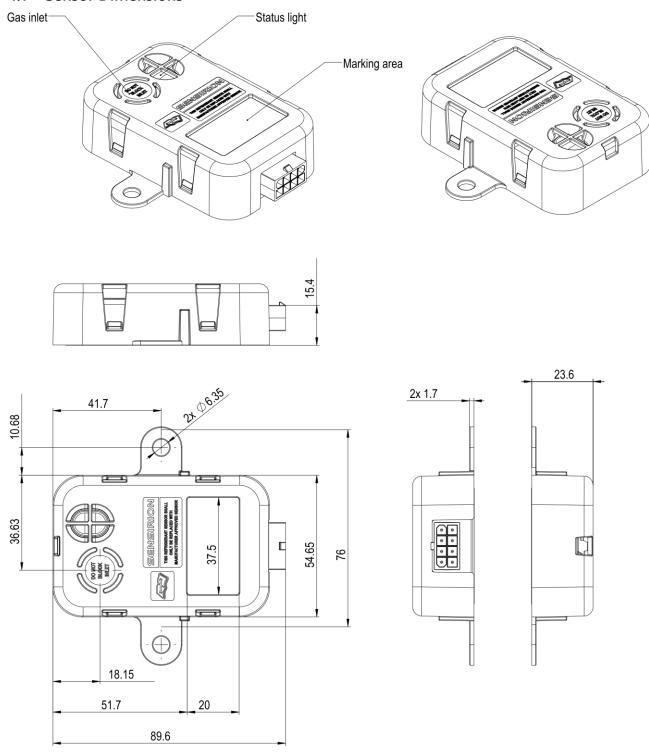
Physical dimensions of the SGD43S-M3-Sx in mm. Tolerances according to DIN ISO 2768-c.
